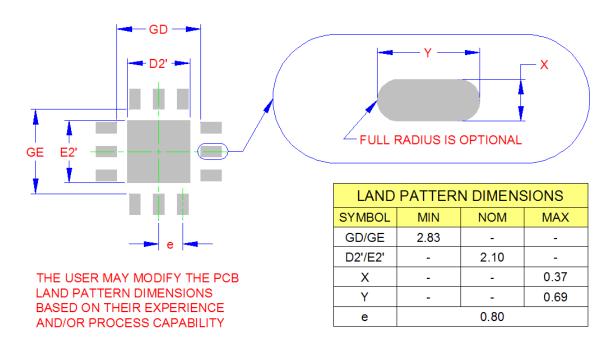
Preliminary 12-Pin QFN 4mm x 4mm Package Drawing
